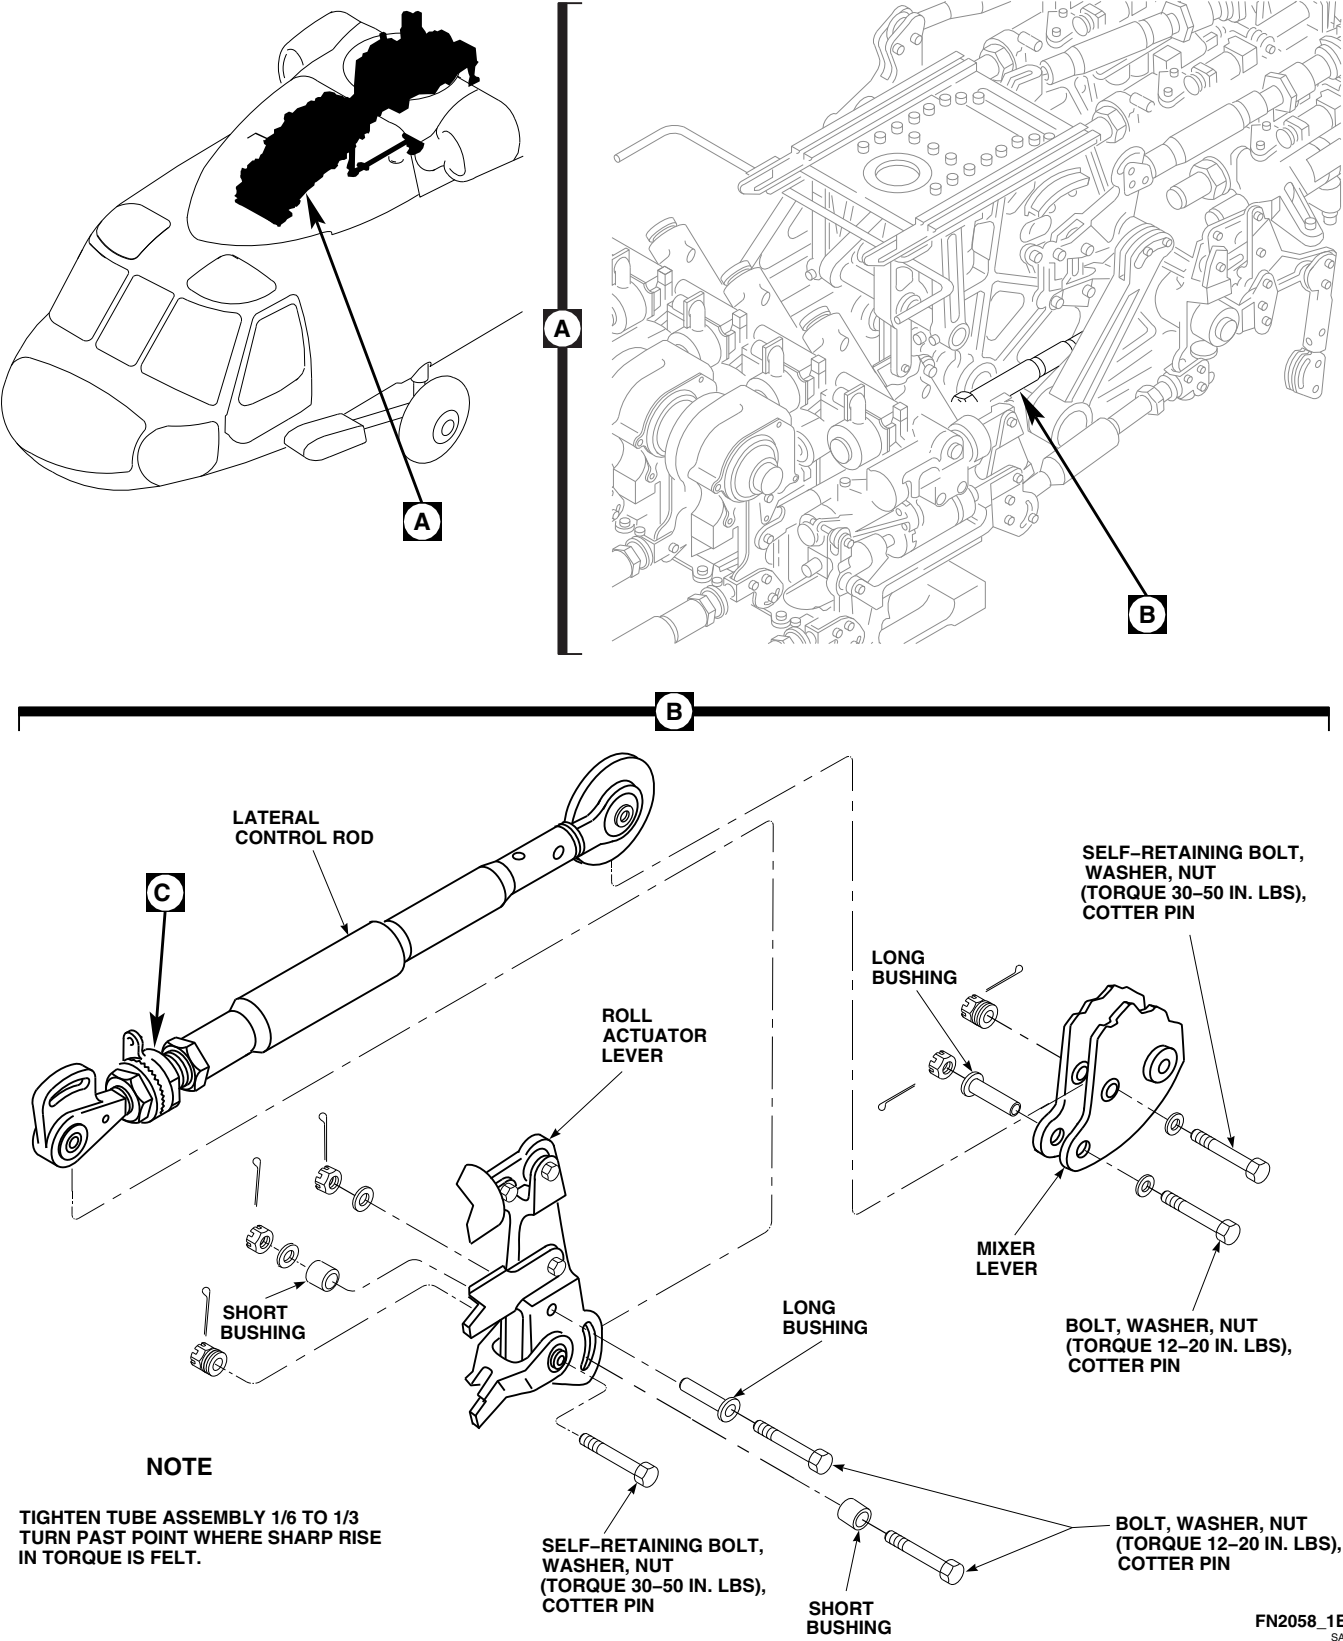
REPLACE ROLL TRIM ASSEMBLY TO MIXER CONTROL ROD (SHEET 1 OF 2)
